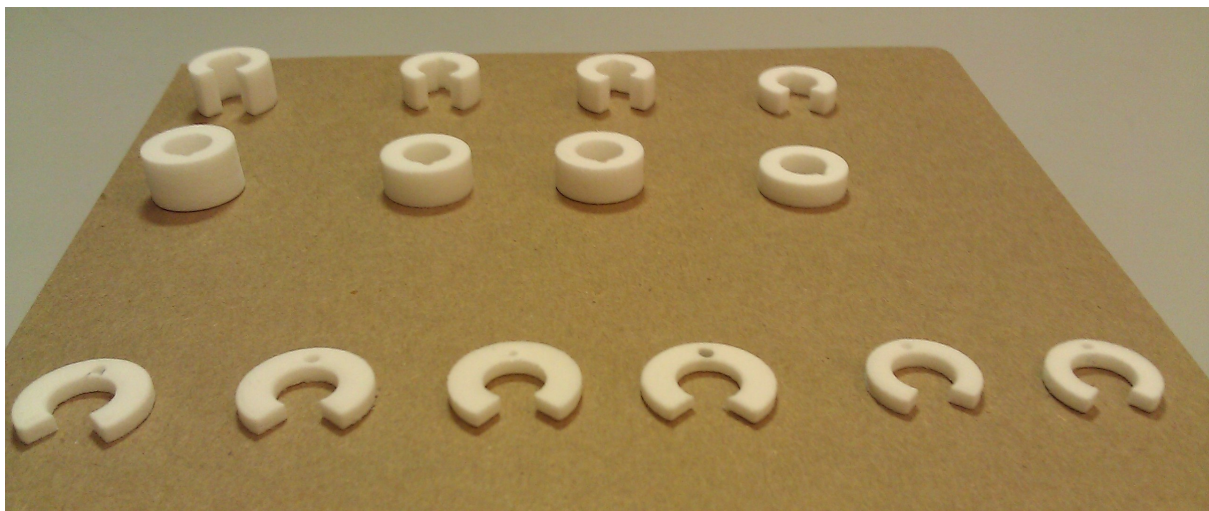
Printed poly-carbonate retainers of different sizes and shapes used to clamp onto the optical rod of the AFM head and hold the probes in place.
